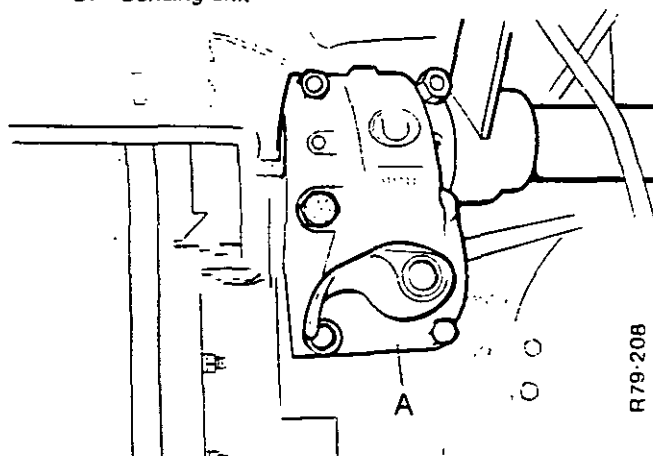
REMOVING THE COVER FOR THE RAM CYLINDER
